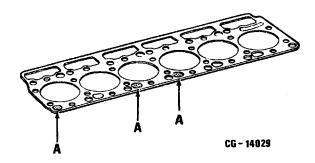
Location of Three Holes in Cylinder Head Gasket
